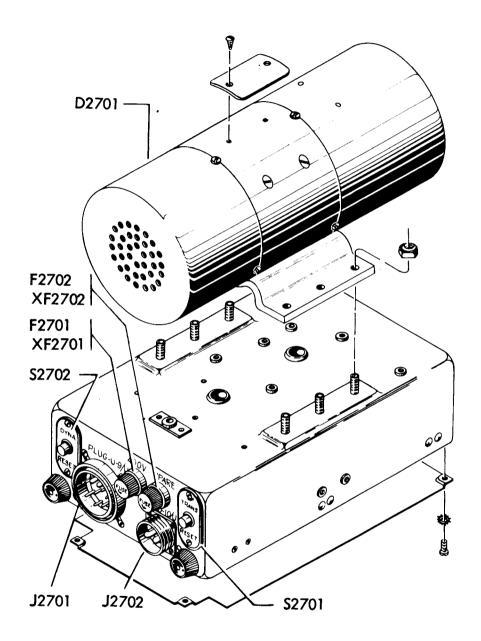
A. Initial Disassembly of Eicor Dynamotor
